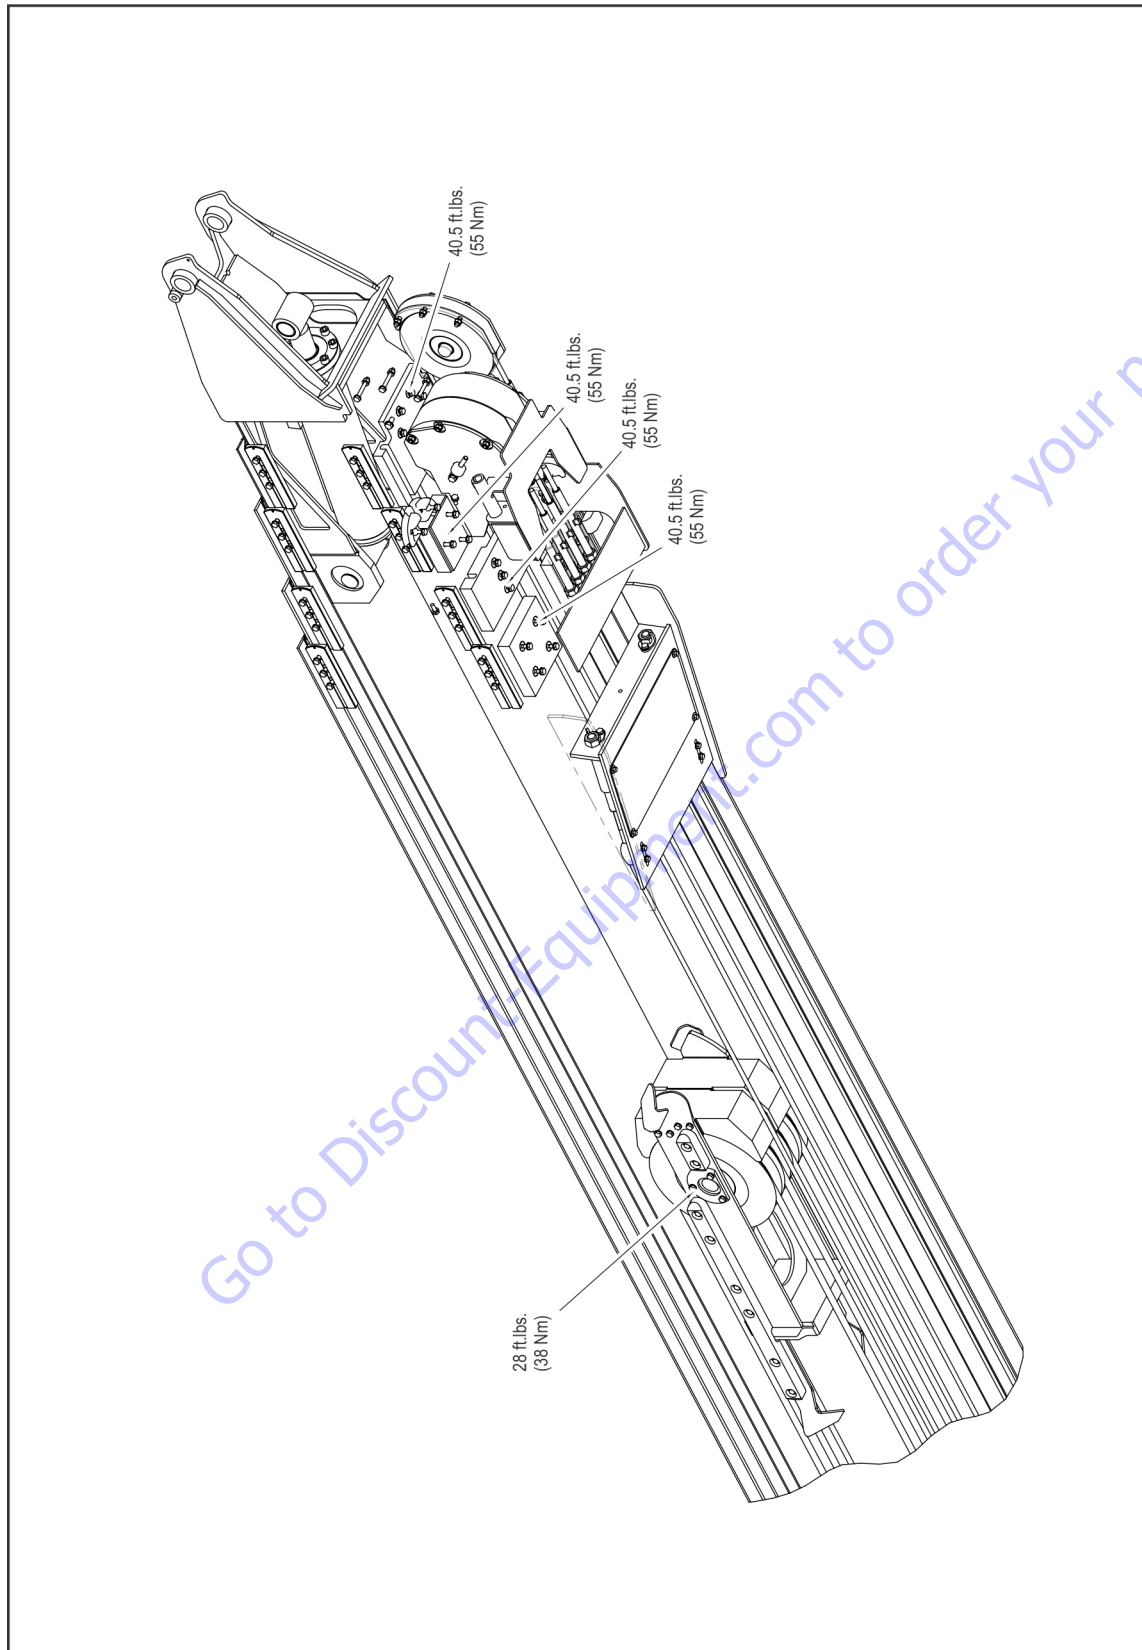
Boom Assembly Torque Values - Sheet 3 of 4
